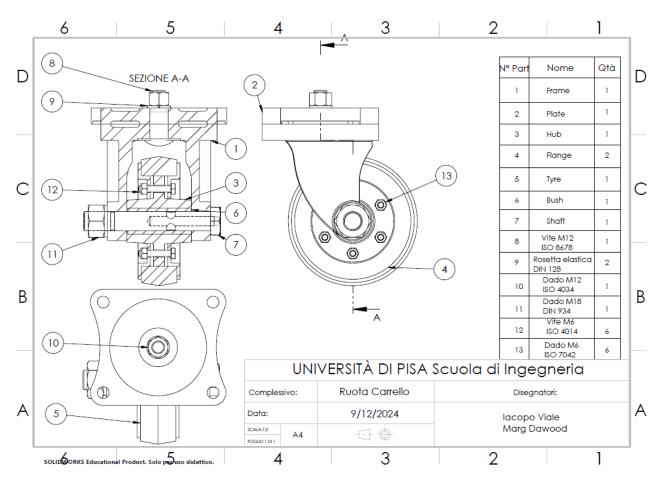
technical drawing of the "Trolley Wheel" assembly"
